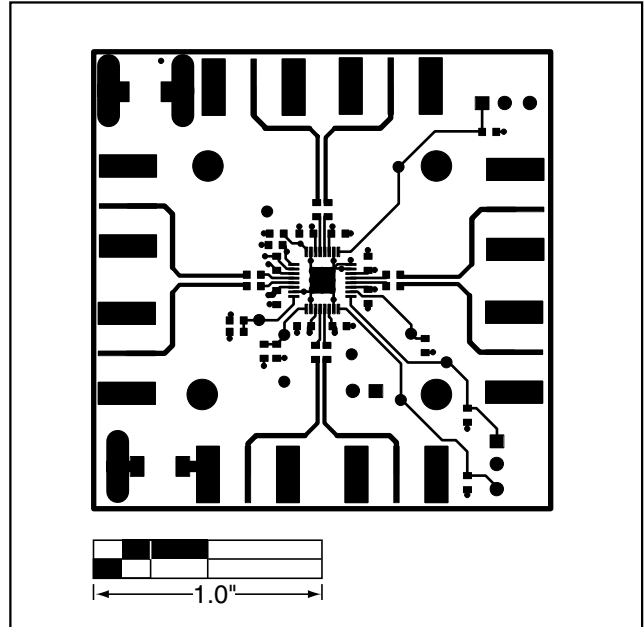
MAX3800 EV Kit PC Board Layout—Component Side
